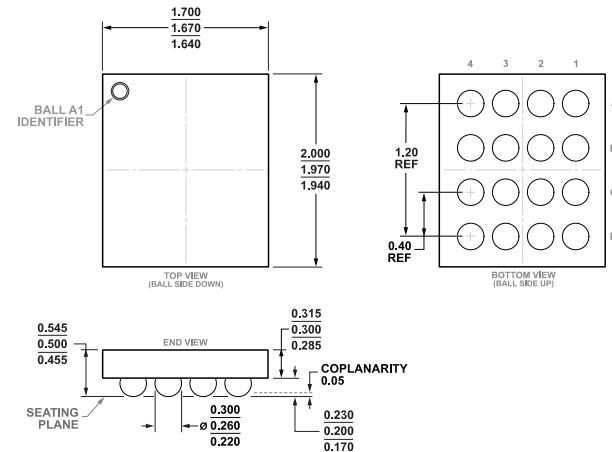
16-Ball Wafer Level Chip Scale Package [WLCSP]
